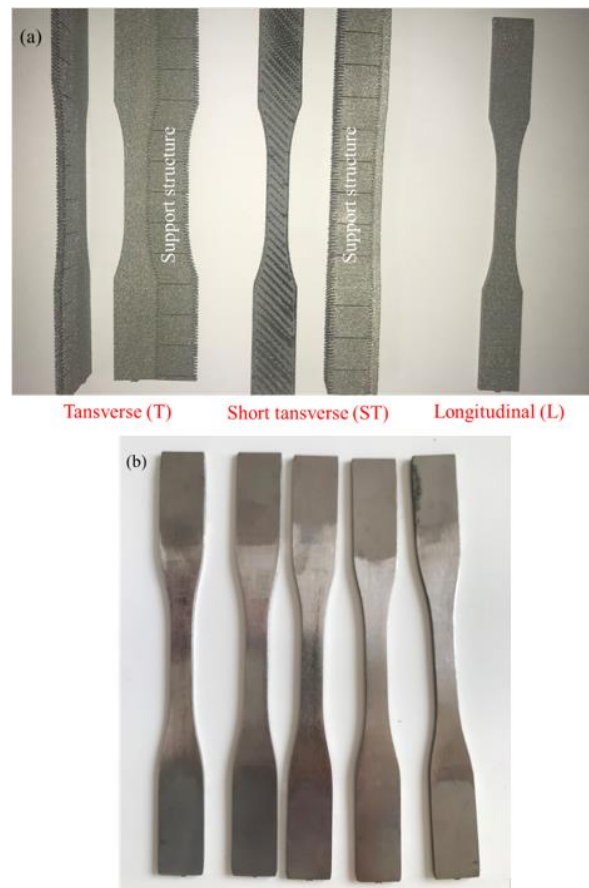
(a) Fatigue test specimen samples representing three build directions and support structures before removal, (b) sample machined specimens.
